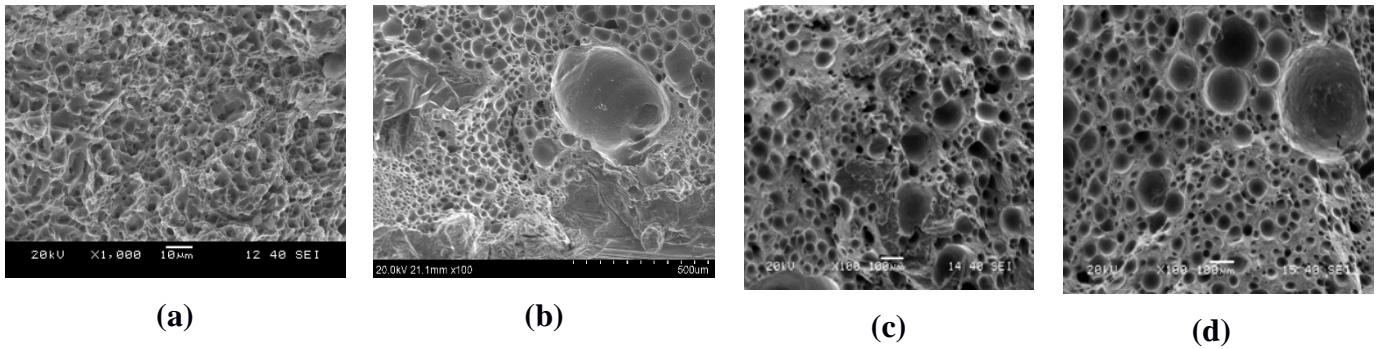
Fractured surface of (a) base material; welded with (b) Helium (c) Argon (d) No-Gas.
